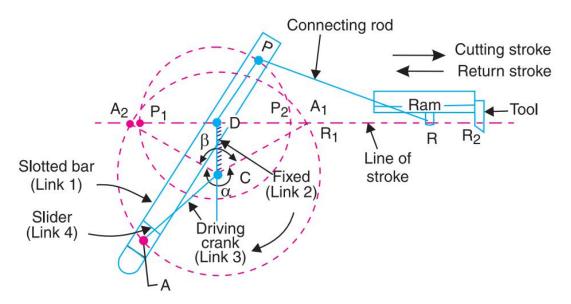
Diagramatic Representation of Slider Crank Mechanism Utilized (Source: Theory of Machines by R.S Khurmi)
